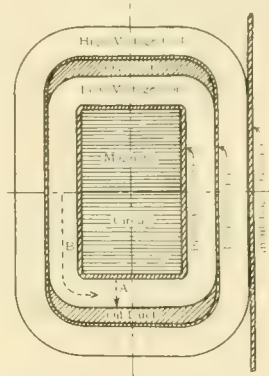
SECTION OF ONE LEG OF A CORE-TYPE TRANSFORMER With concentric coils.
